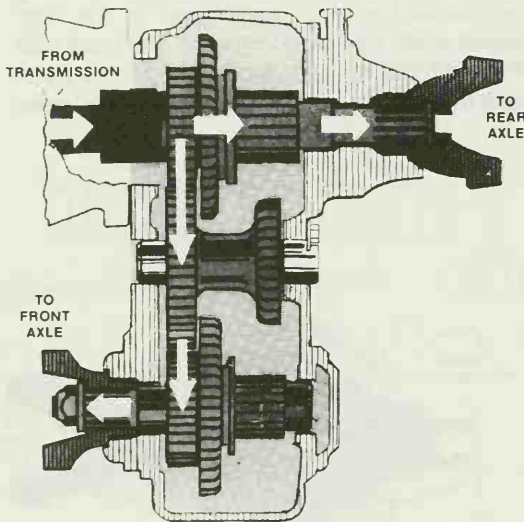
Power flow through the transfer case in four-wheel drive. (American Motors Corporation)
